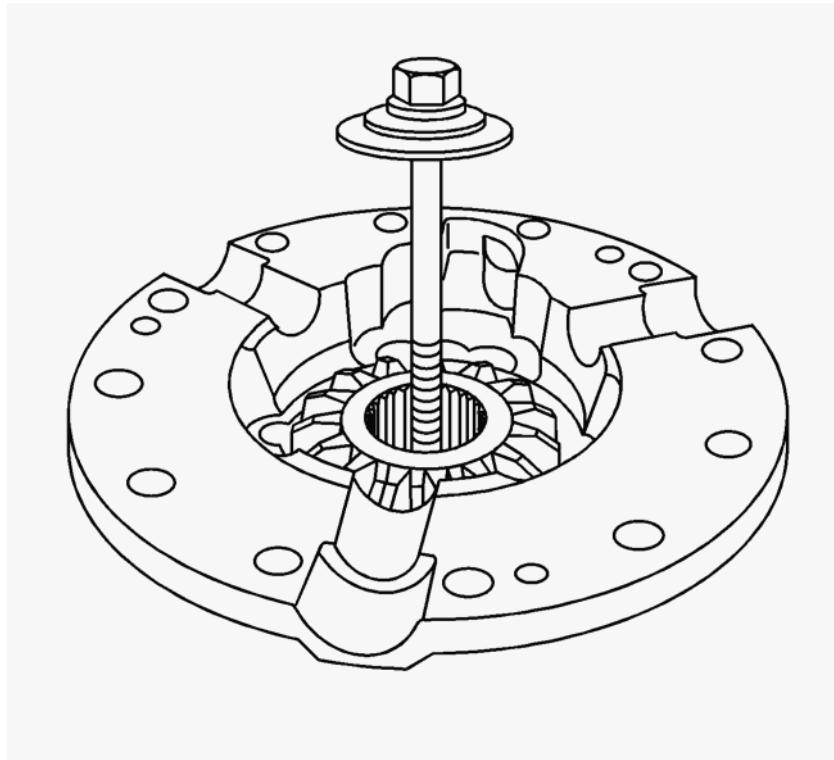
Installing Bolt & Washer Assembly Through Differential Case Half
